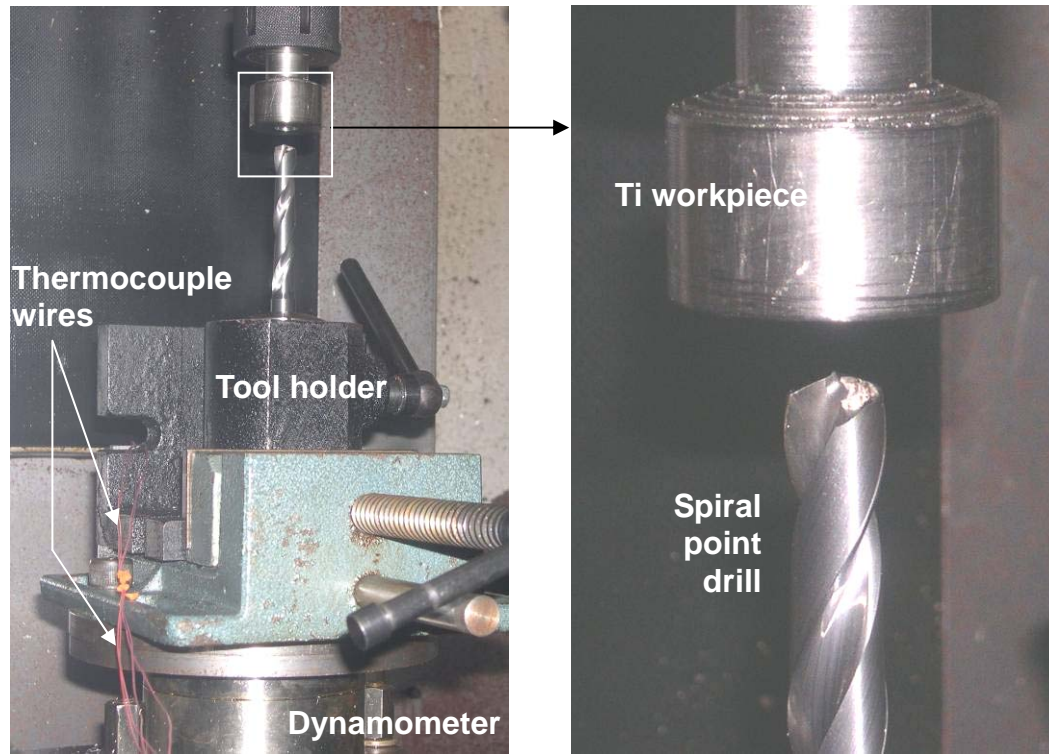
Experimental setup with workpiece in the spindle and drill in a vertical tool holder.
